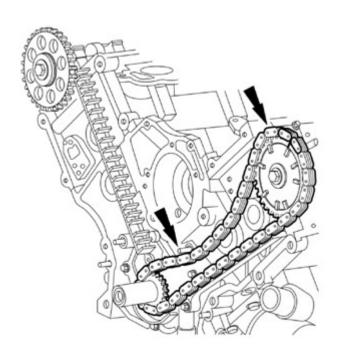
Locating Timing Mark On Crankshaft Sprocket With Single Blue Link On Chain Courtesy of FORD MOTOR CO.
